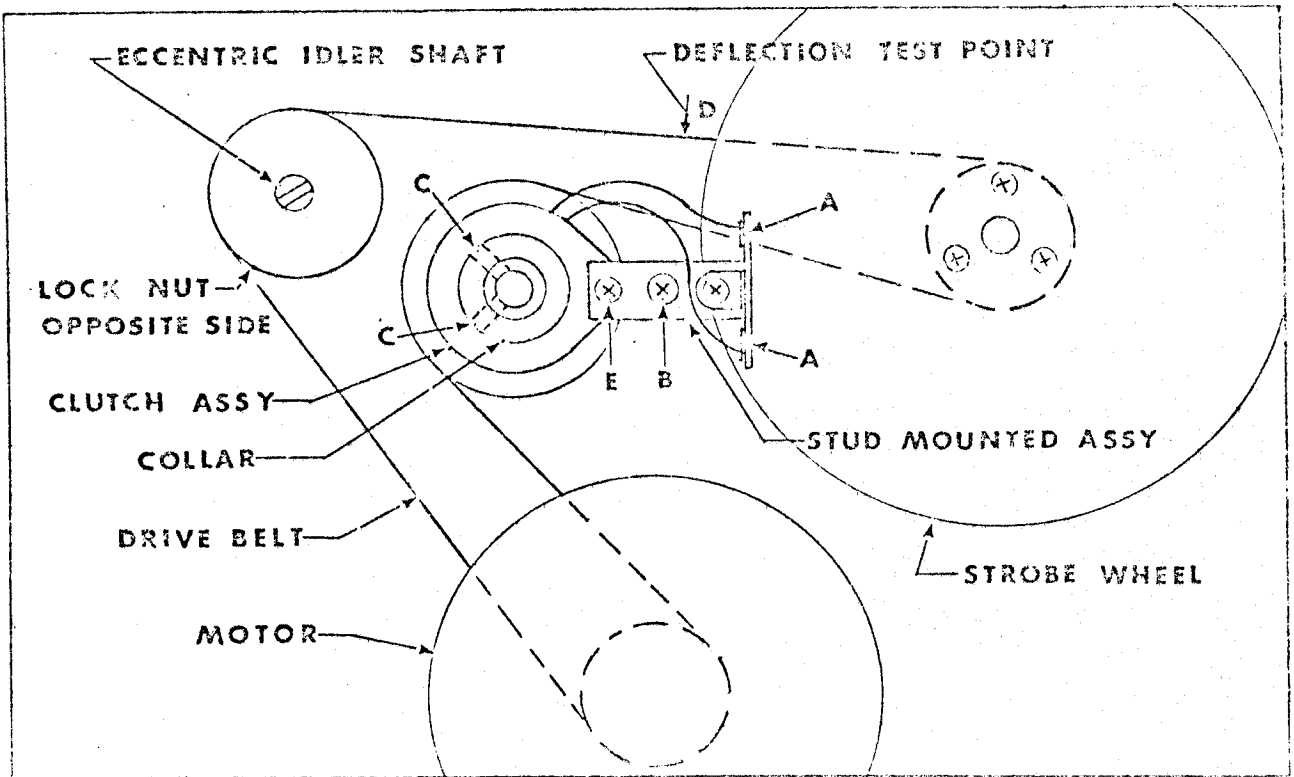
PICKER CLUTCH AND DRIVE SYSTEM
